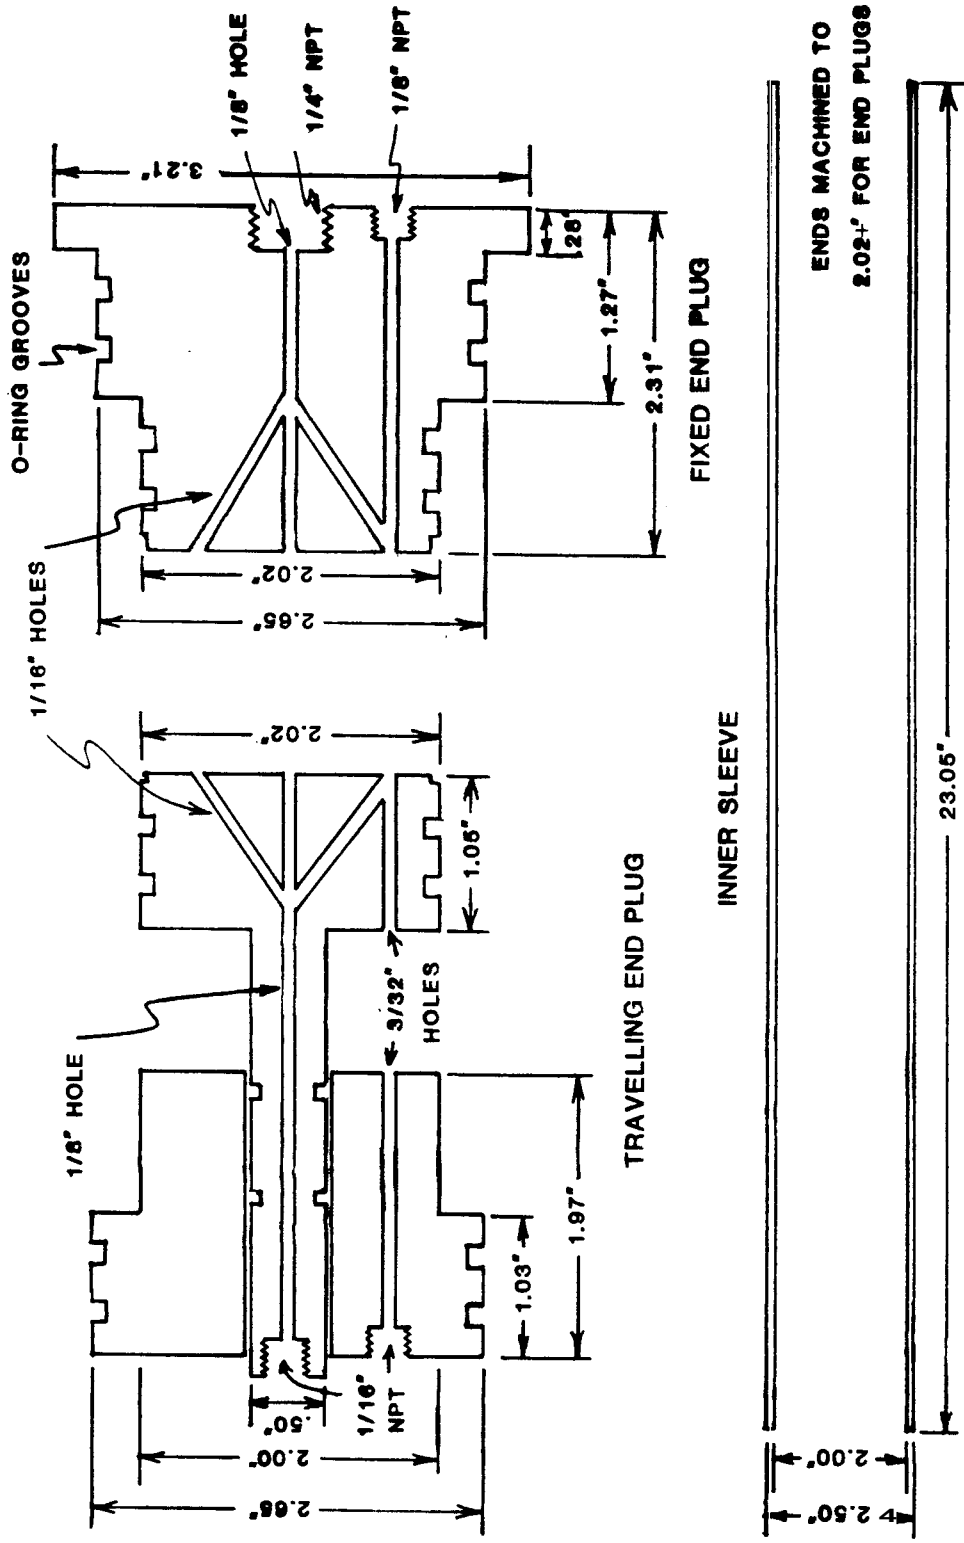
Dimensions of Core Holder Inner Sleeve and End Plugs
